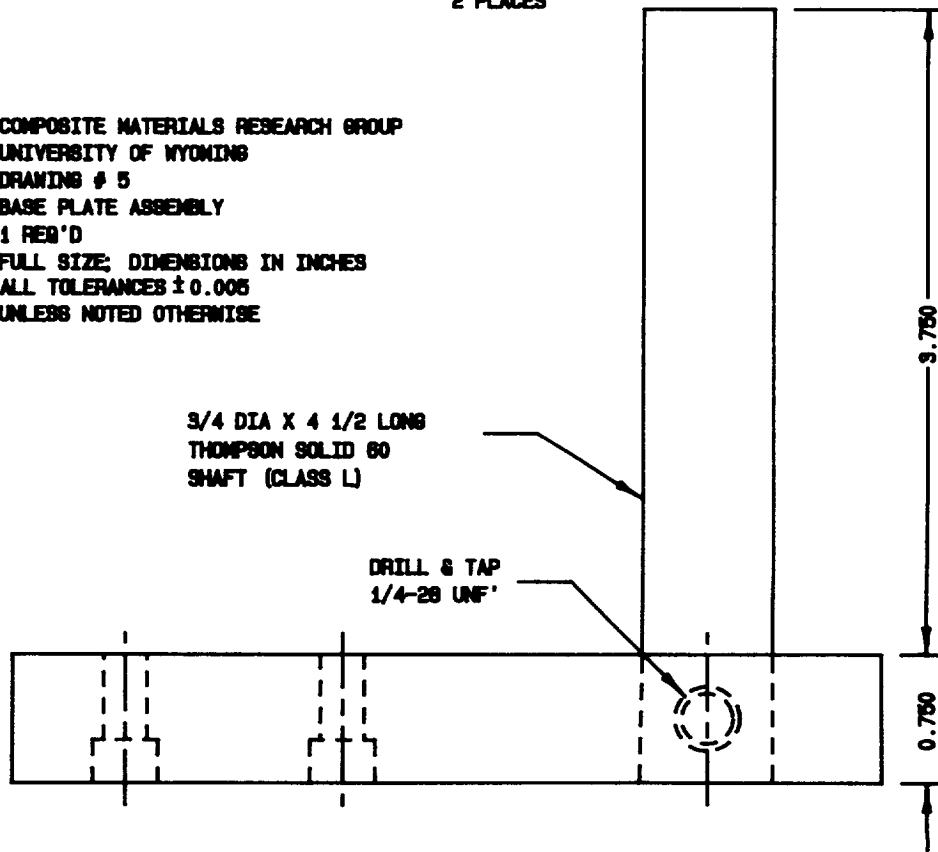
Iosipescu Shear Test Fixture Base and Post Assembly.
